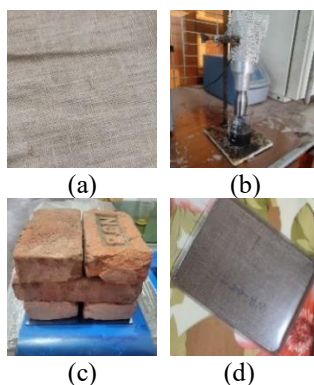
(a) Used jute mat; (b) Sonication of epoxy and WHA; (c) Mold preparation through hand layup method and pressing with weight; (d) Demolded sample
